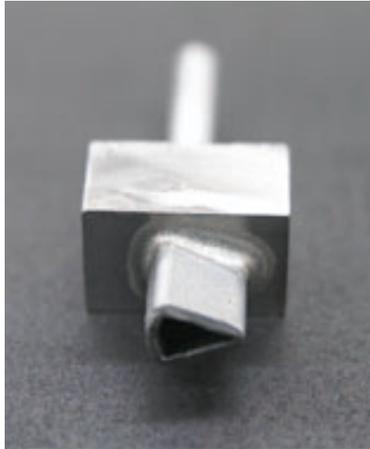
Successful test braze of a molybdenum suppressor rail to a stainless steel holder specimen.
